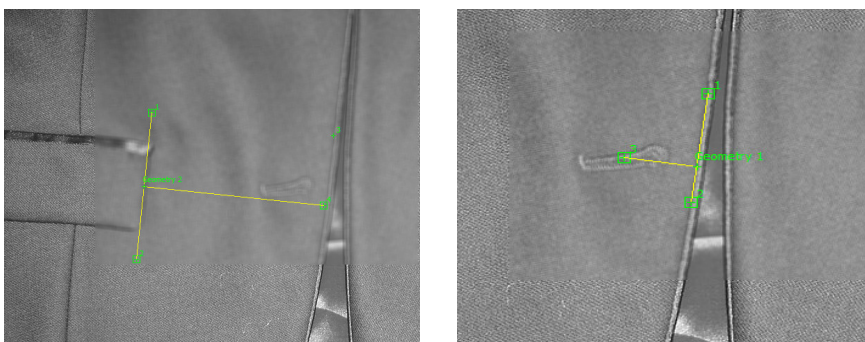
Ready garment inspection (pocket flap and buttonhole).
